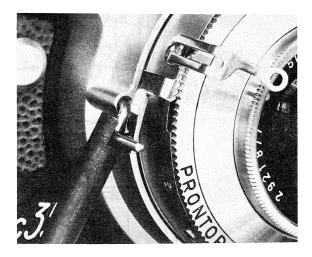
Shutter Release Crank-Outside Terminal Adjustment
